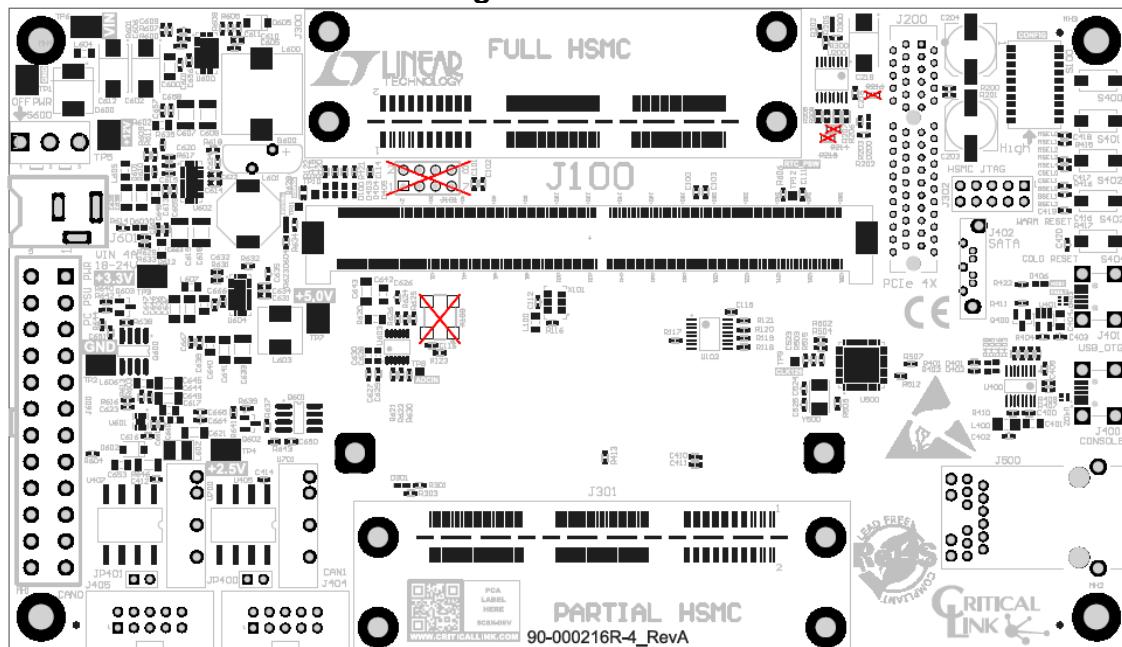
MitySOM-5CSX Development Kit Outline, Mounting Hole Locations,
